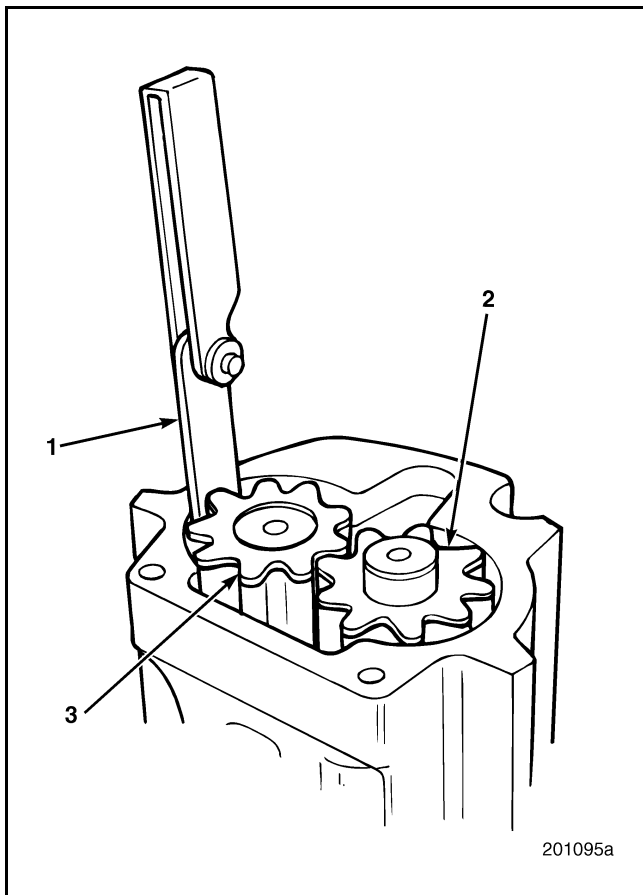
Oil Pump Driving/Idler Gear Assembly Side Clearance Check
